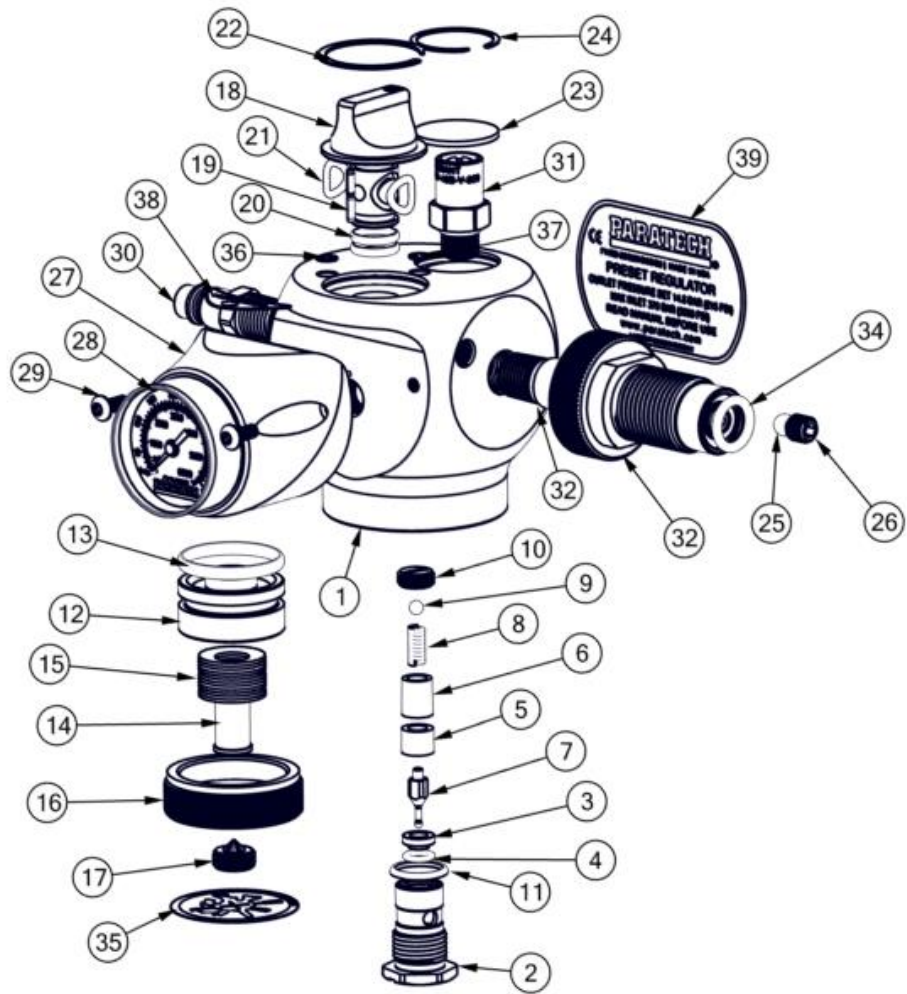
22-895401DG3 Regulator ALB G3 Preset DIN Exploded View
